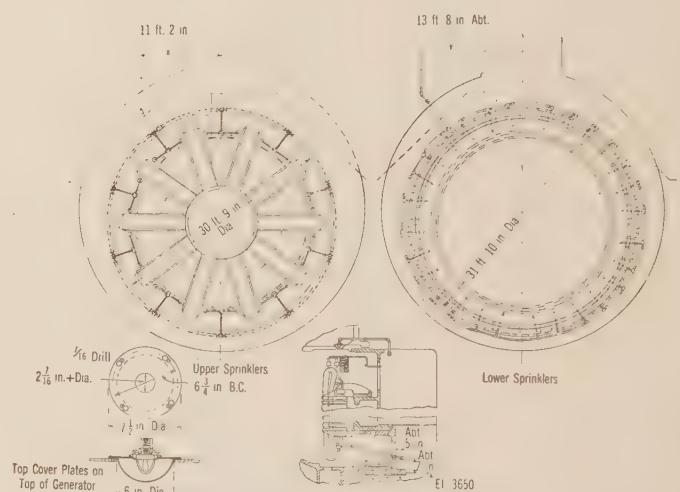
DETAILS OF SPRINKLER HEAD AND PIPING INSTALLATION IN 65,000-KV-A. GENERATOR
